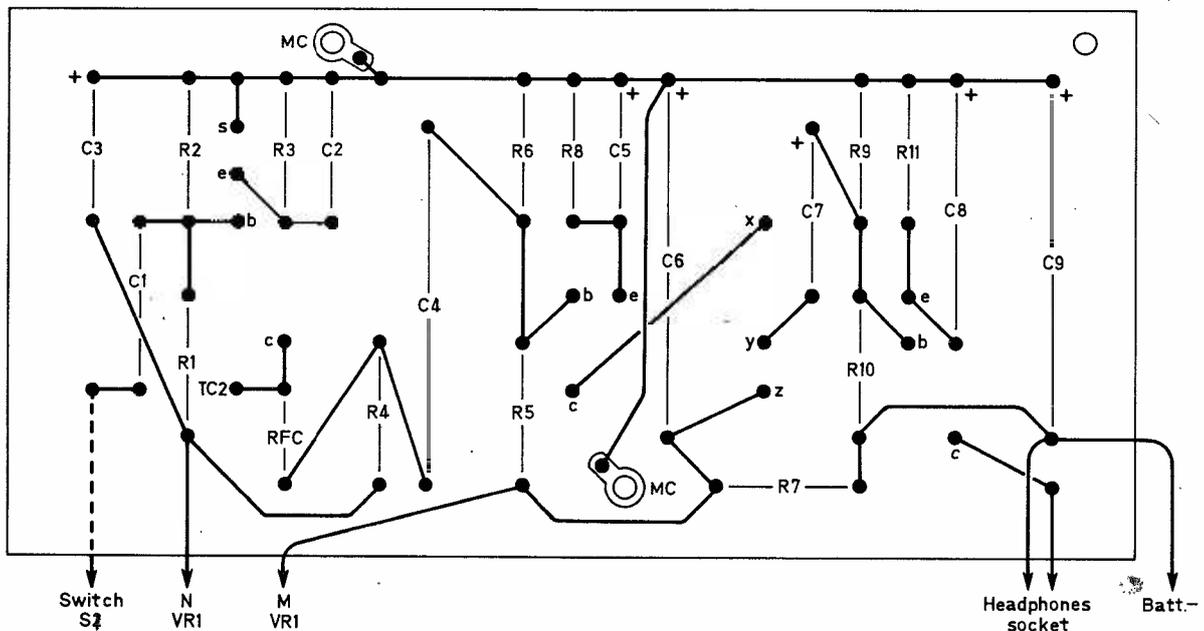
Bottom view of circuit board showing interconnection of components.
